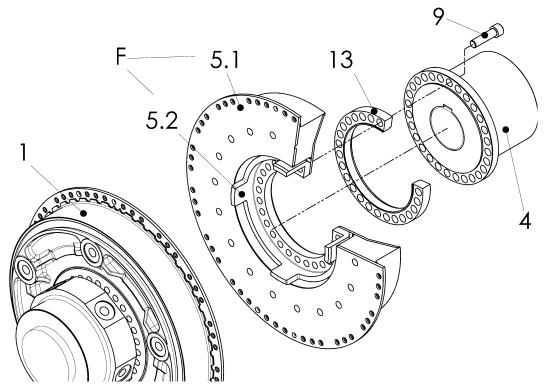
Mounting the centrifugal protection assembly (F)
